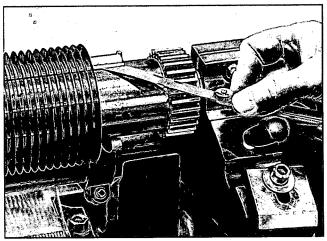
Measuring clearance between circular knife spindle and stripper plate.
